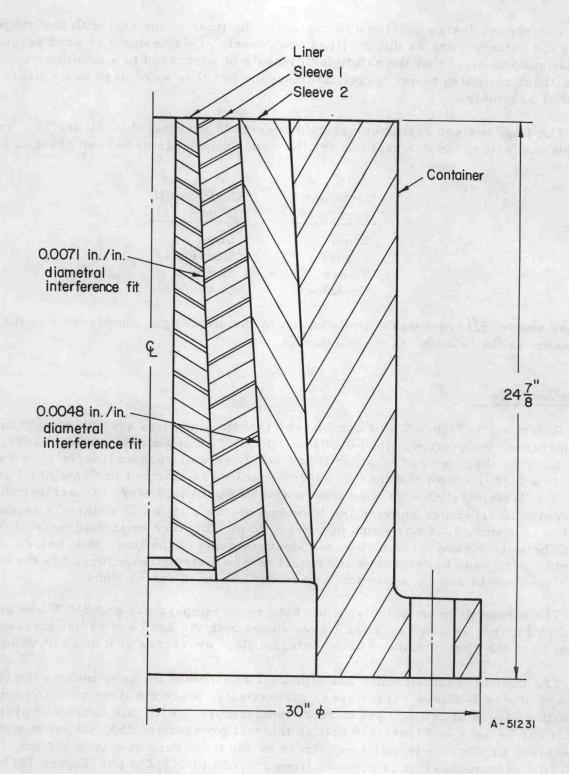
CROSS-SECTIONAL VIEW OF CONTAINER II
